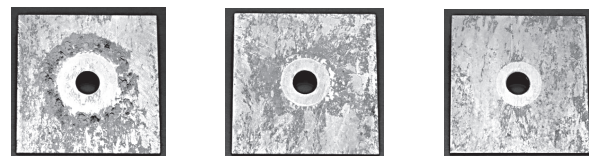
Test results of galvanic corrosion; steel (left), aluminum (middle) and plastic (right) bolts on magnesium alloy AZ91 (after 288 hr. salt spray test).
